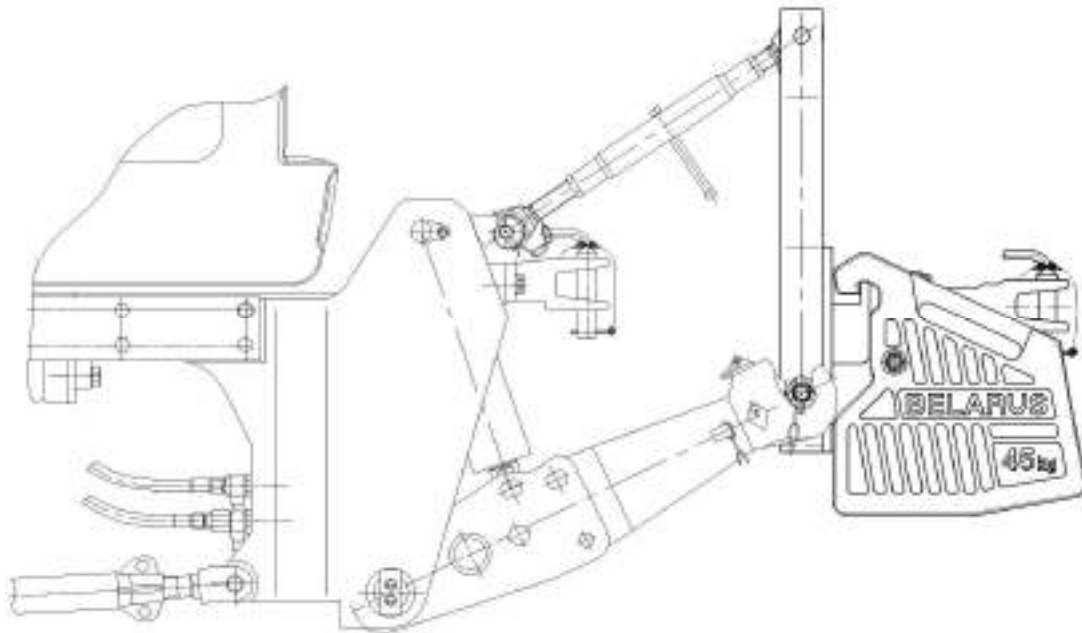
Scheme of installation of linkage-mounted ballast weights to FLL
